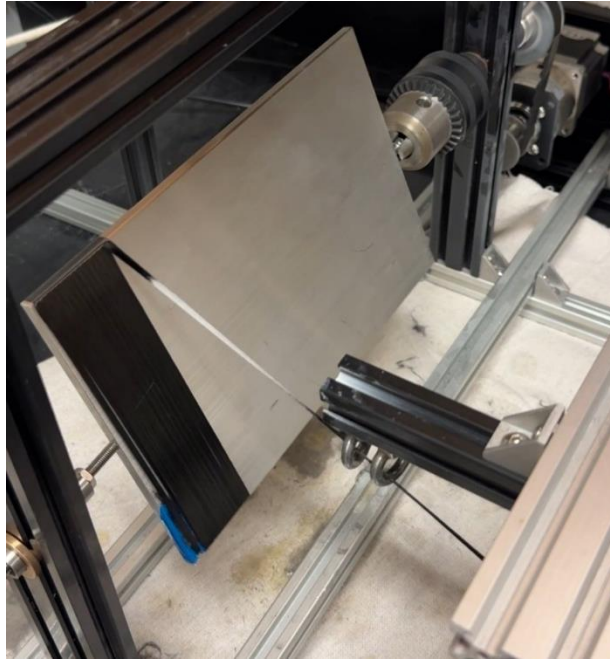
Experimental setup for the manufacturing of mechanical test samples.
